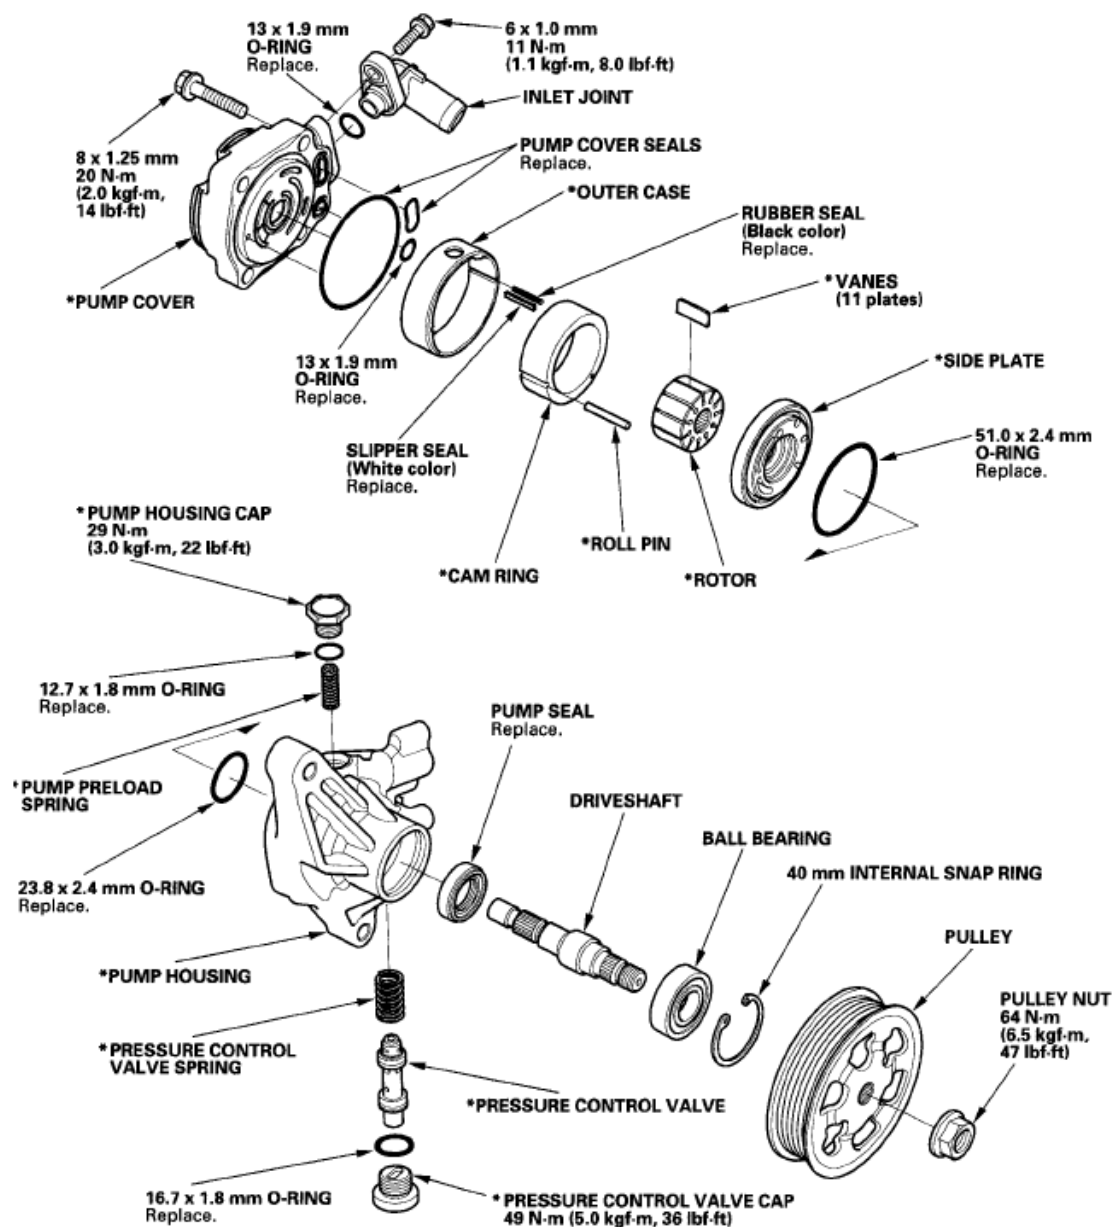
Exploded View Of Power Steering Pump (With Torque Specifications)
